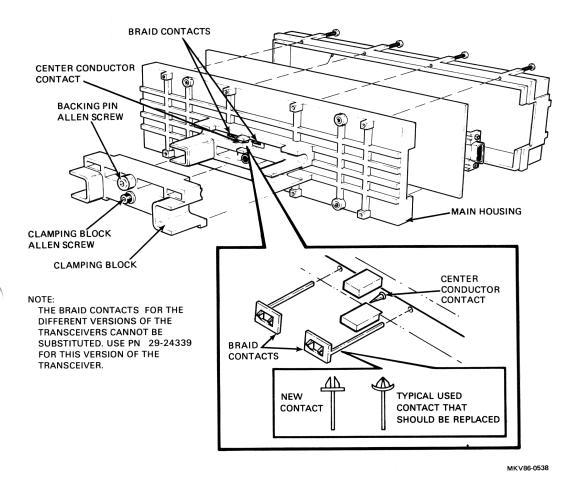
Hardware for Installing the H4000 Transceiver on a Coaxial Cable
